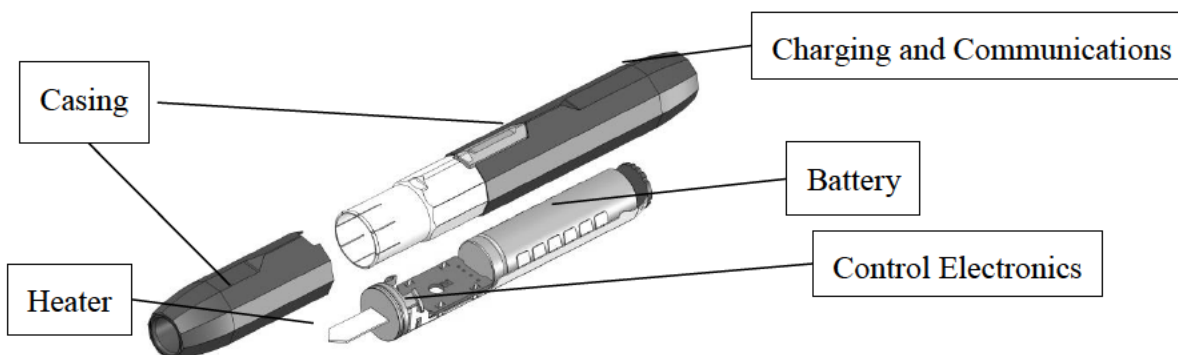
An Exploded View of the Holder Showing the Component Parts and Assemblies
